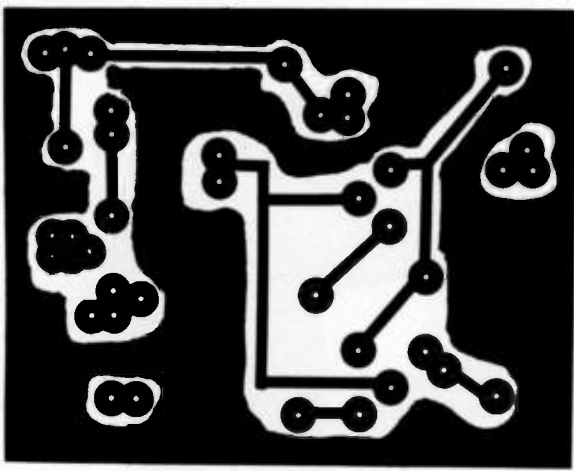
PC board layout, foil side. (Single-sided, fiberglass, copper-clad board.)
